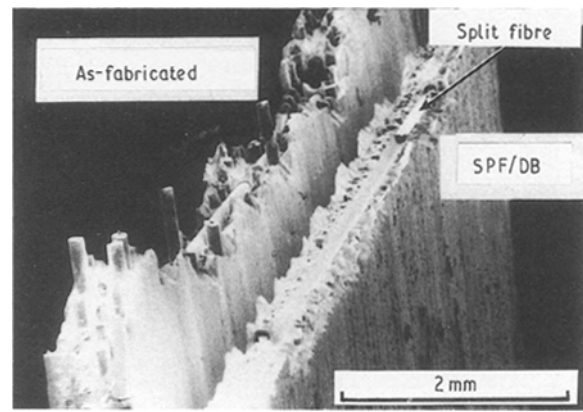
Fracture surface morphology for statistically tested specimens, SCS-6/Ti-15-3 [0/90/0].
